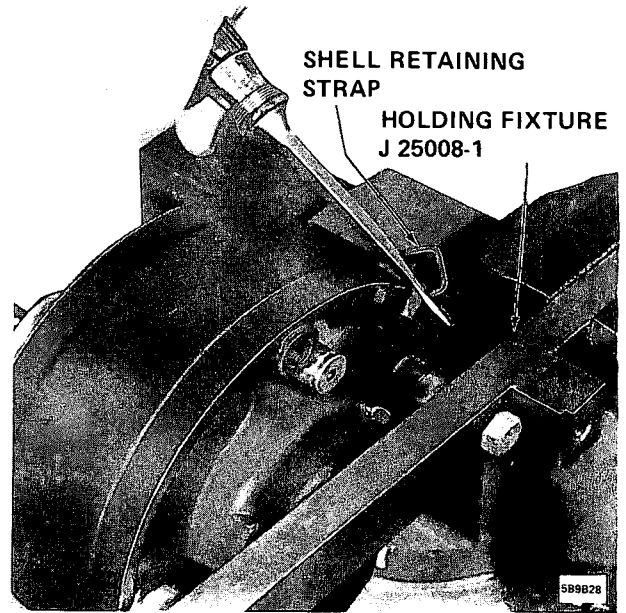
B-53 - Prying Out Shell Retainer Strap - 4 Cylinder Compressor
